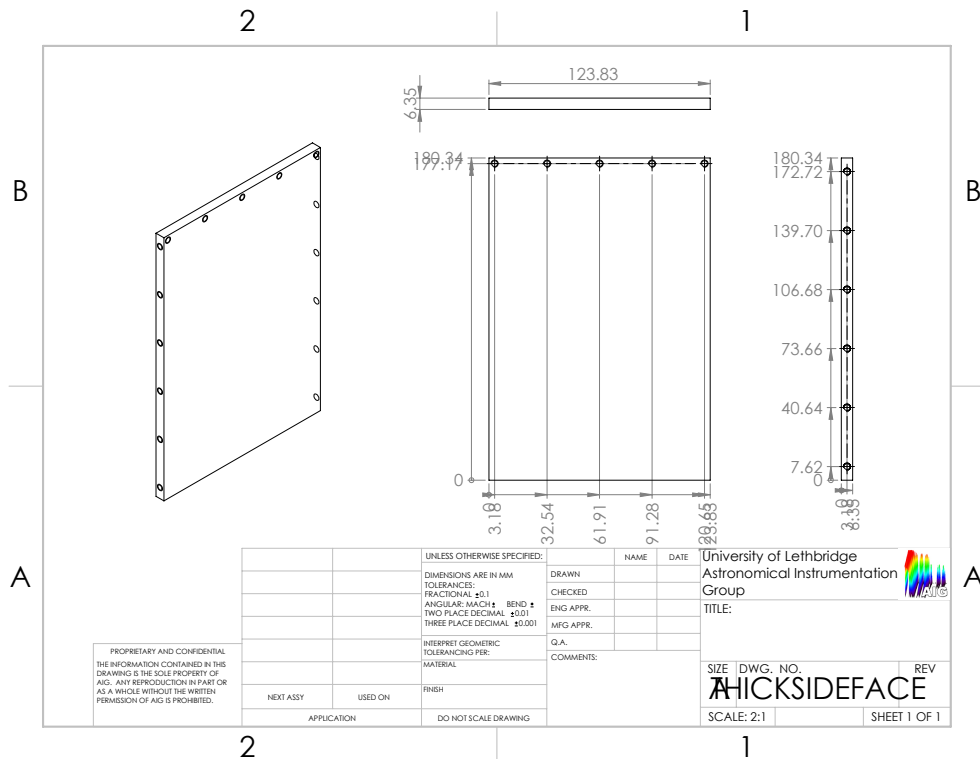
The thick side face of the CTIC. Side holes along the length and bottom holes are threaded, with tapped holes at the top.
